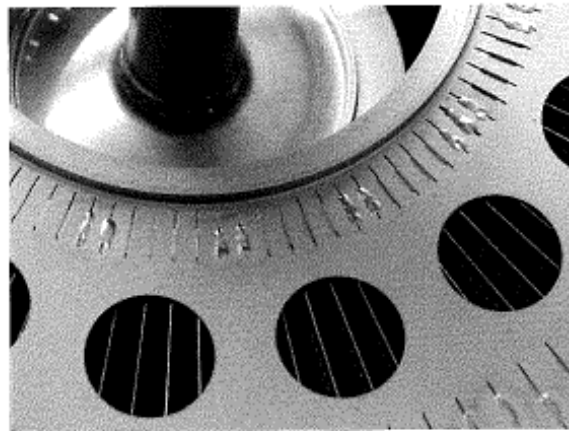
Burn down weld on PMD Top Plate-Sponge Panels
